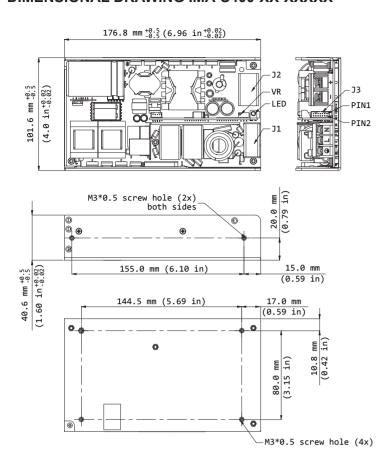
Dimensional drawing IMA-S400-xx-xxxxx
